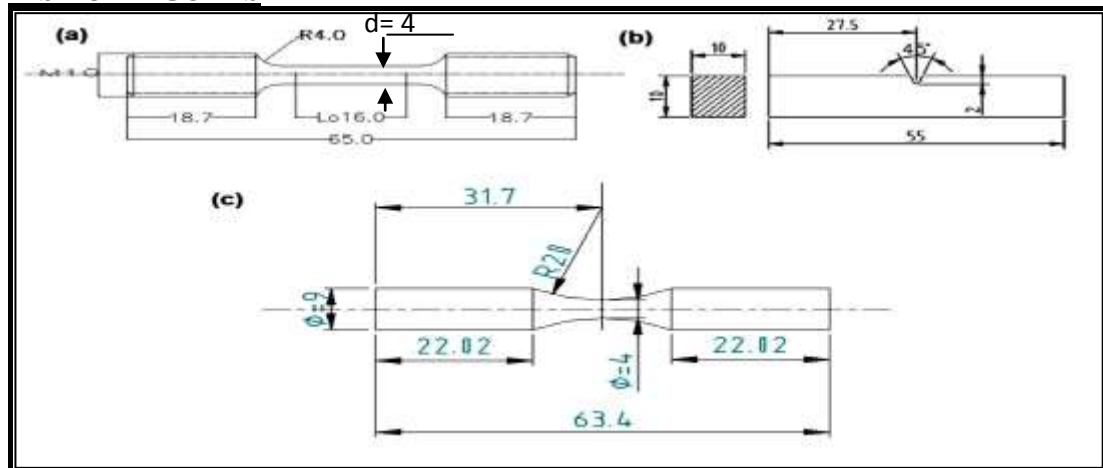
Geometry and dimensions of tests specimens; (a) Tensile specimen; (b) Impact specimen; (c) Fatigue specimen. (b) (All dimensions in millimeter).
